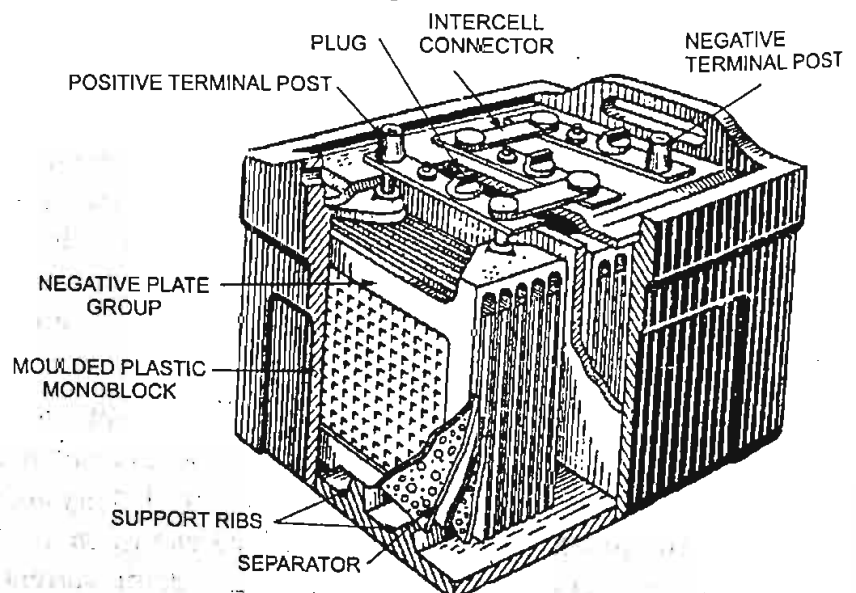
Exploded View of Exide HSP Classic Motive Power Battery
